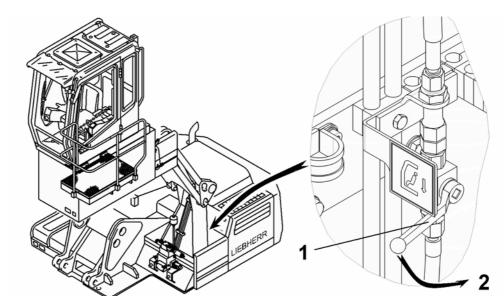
Shutoff valve on the rear of the cab lifting device
